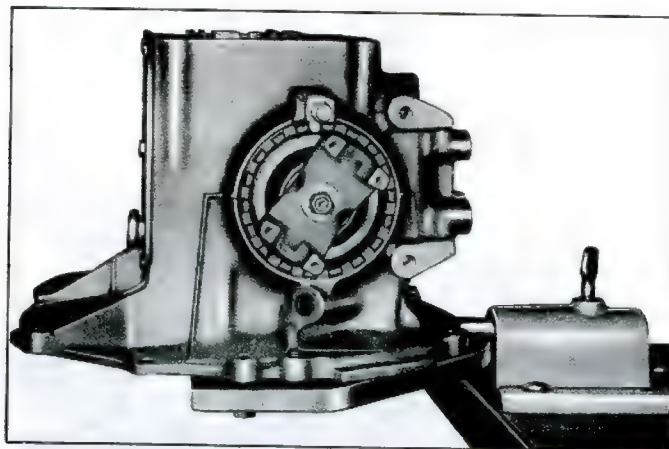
Differential Carrier in J-3289-01 Fixture and front pump shaft with the applicable converter splines (fig. 12).
